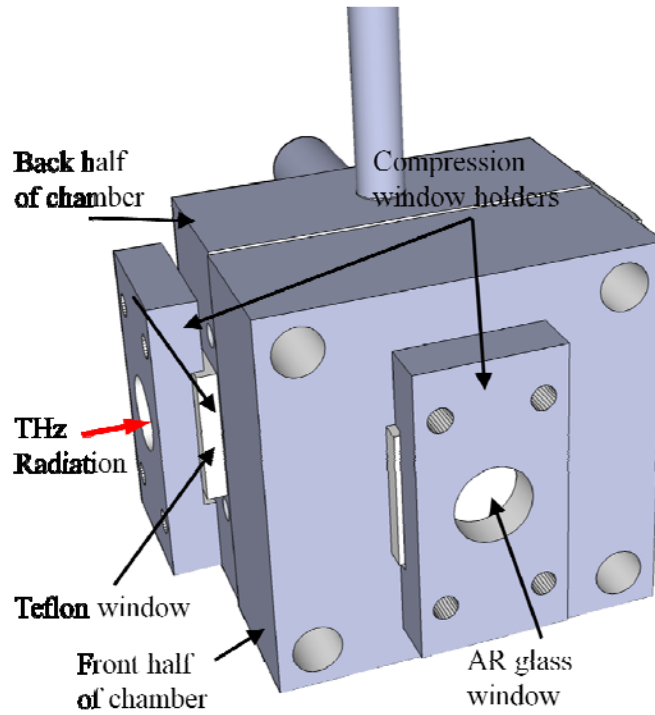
Assembled CAD model of the PA chamber with labels of primary components.
